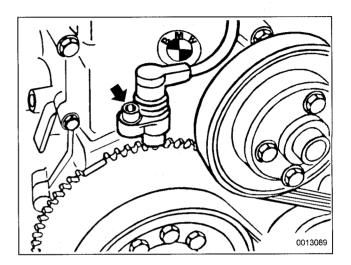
Crankshaft position/rpm sensor mounted at front of engine on 1992-1995 cars. (arrow).
